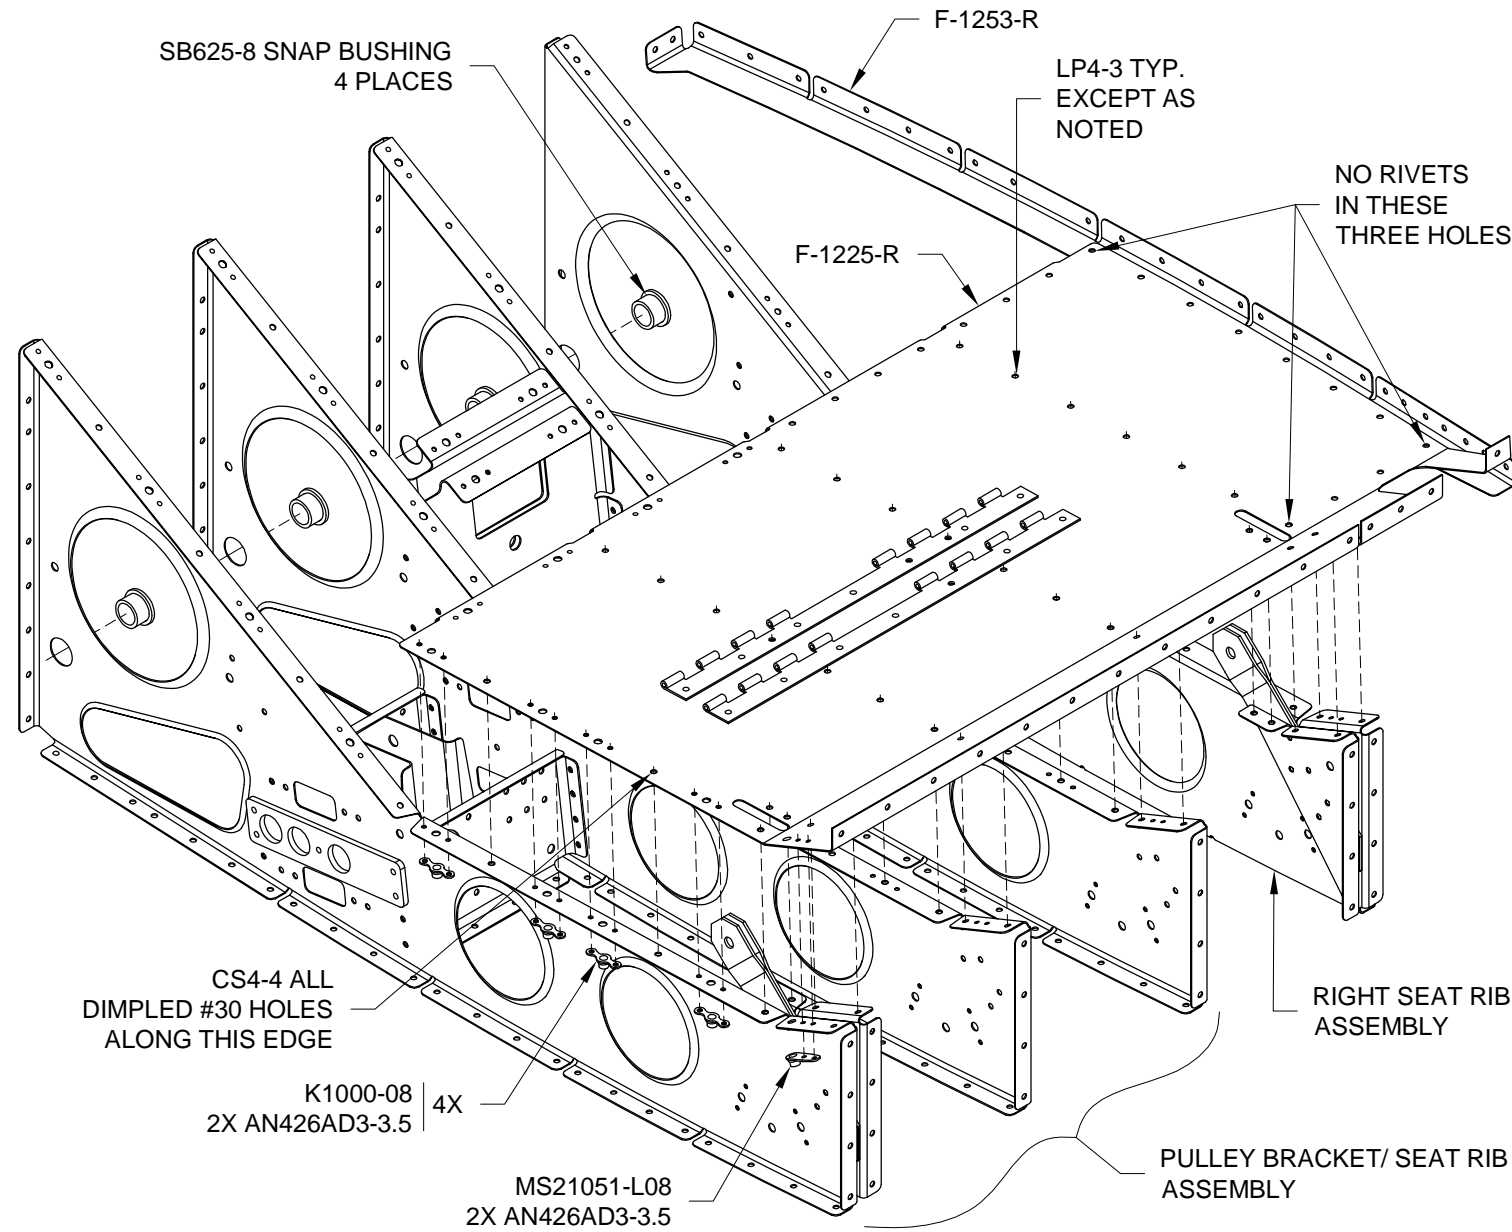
RIGHT SEAT FLOOR ASSEMBLY
